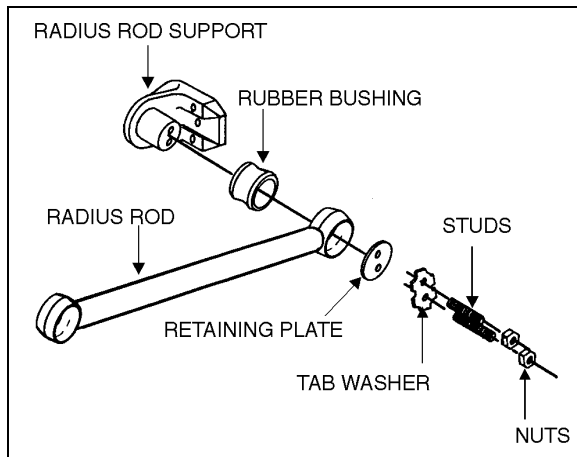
TYPICAL RADIUS ROD SETUP 16010
